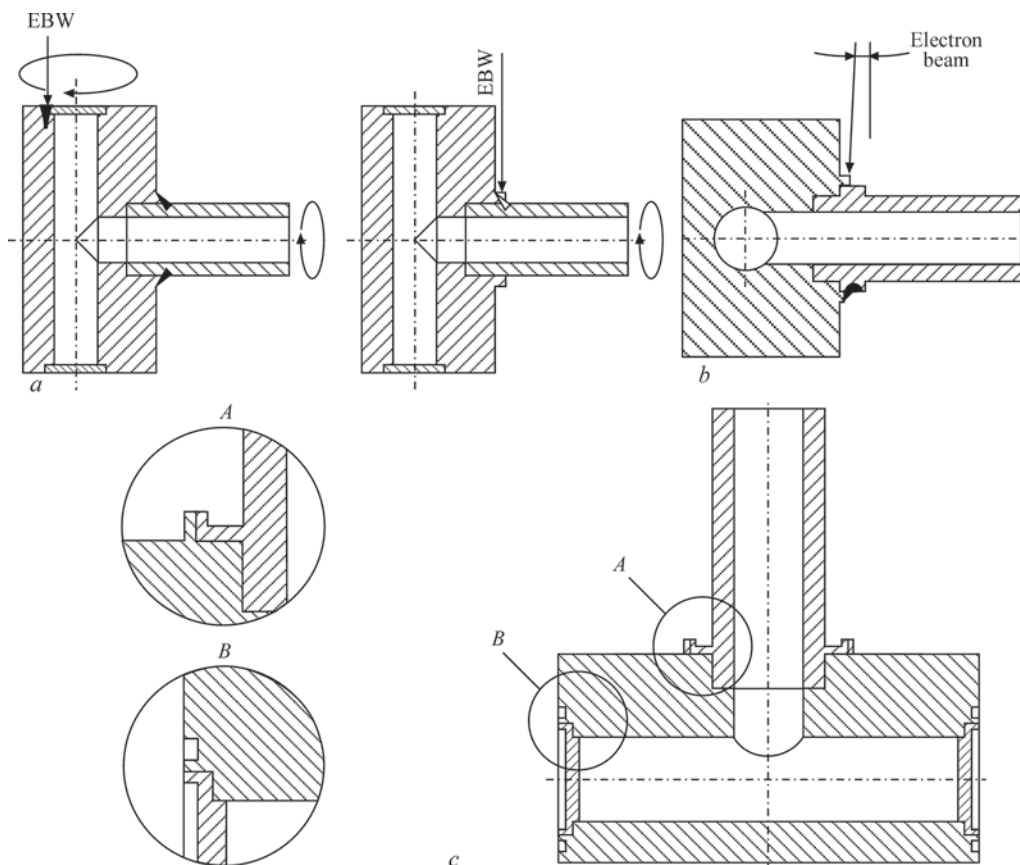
Three stages of modernization of the assembly welded joint design: fish-mouth welding of the nipple with the body is replaced by a scheme with a “collar” fused to the nipple wall, the body with plugs is fish-mouth welded (*a*), the nipple is modified for welding with an inclined electron beam (*b*), modernization of fitting joints in the form of flanging the joint edges (*c*)
